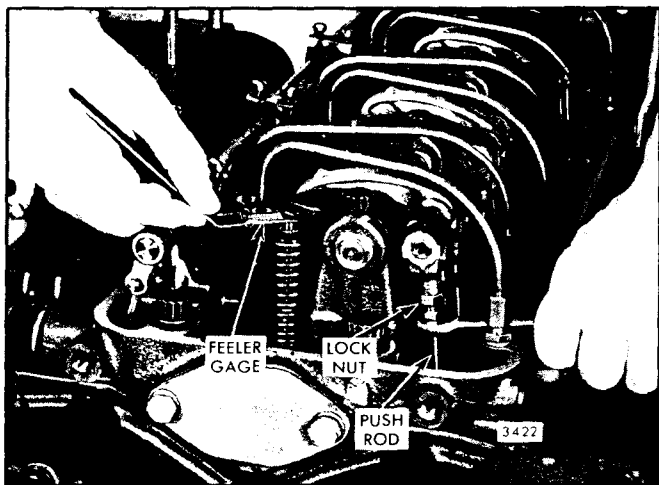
Adjusting Valve Clearance (Two Valve Head)
